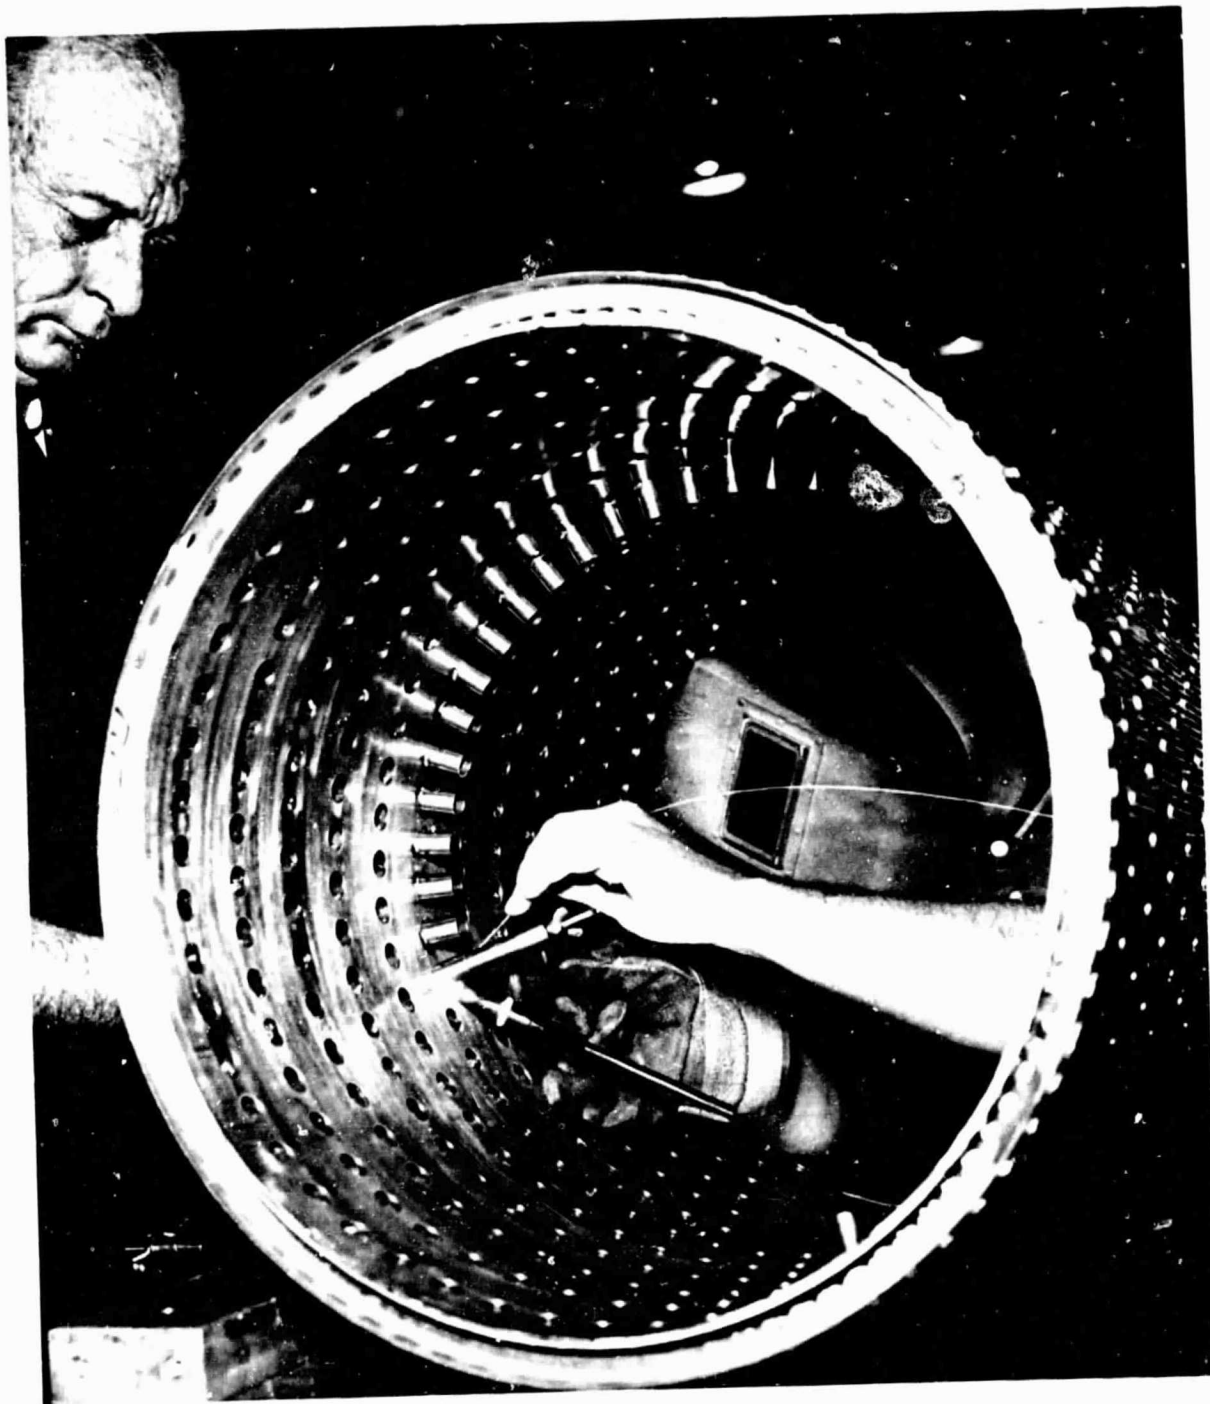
Welding Acoustic Tubes into the Centerbody, QCSEE Core Exhaust Nozzle.
